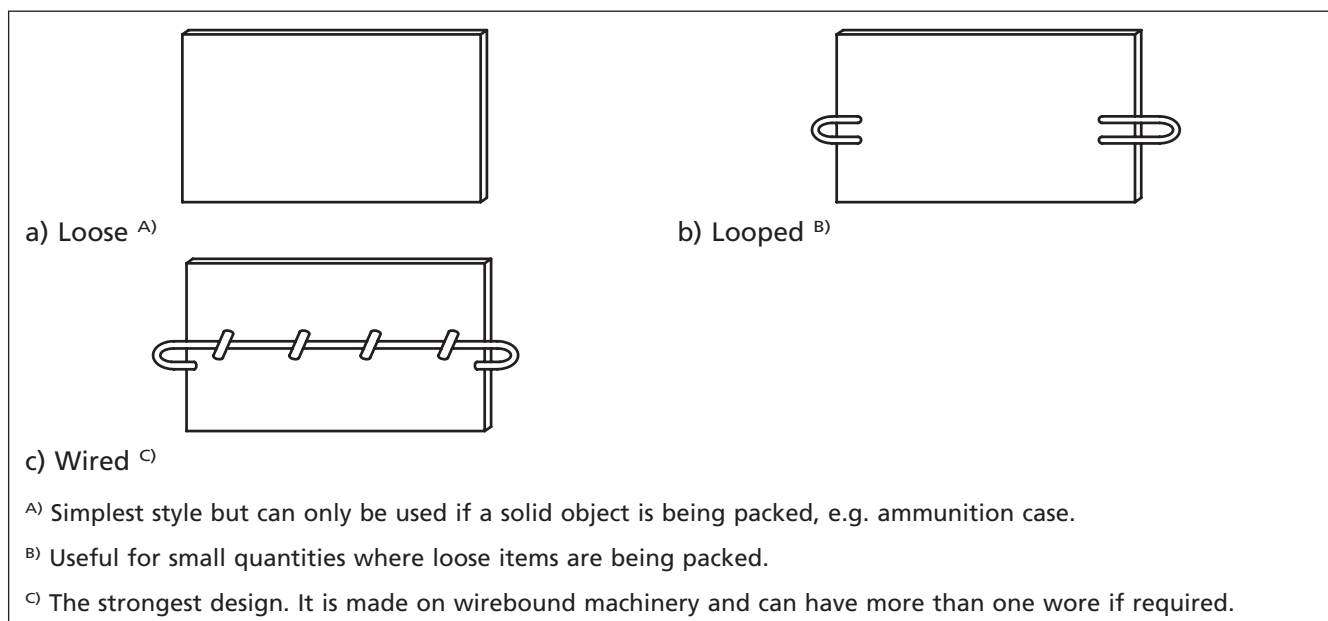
Styles of allbound cases showing construction details (2 of 2)
